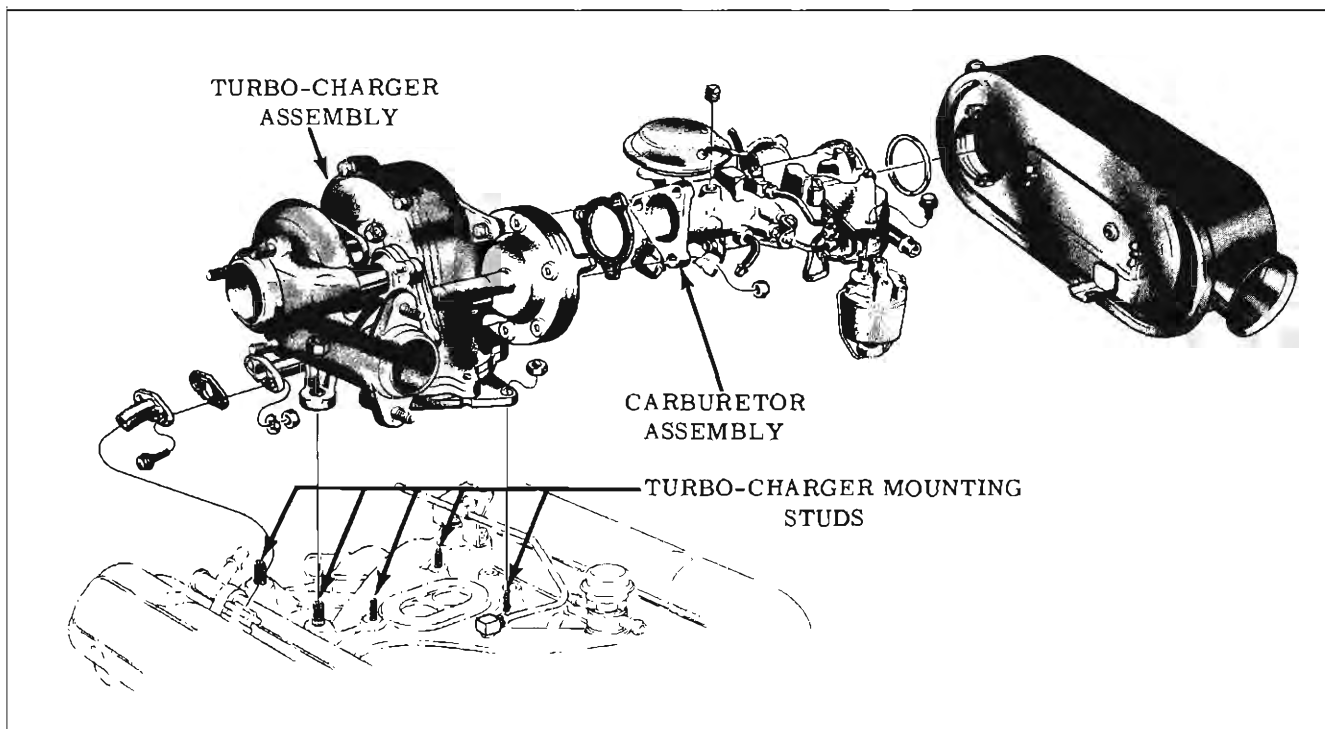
Turbo-Charger and Carburetor Attachment
